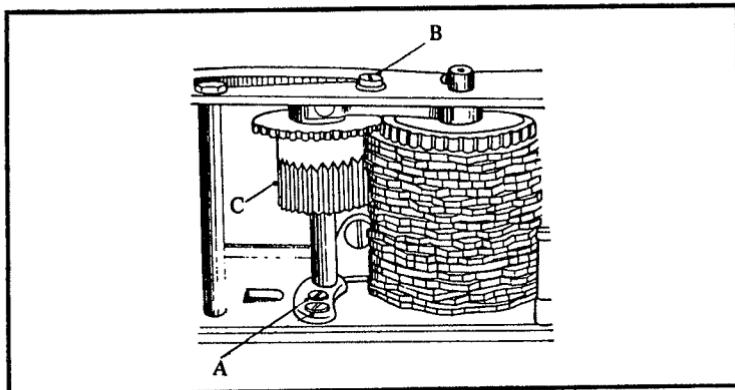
Correcting the meshing of the cam shaft gear to the main gear on the Model 960 is simple.
